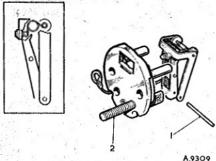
Fitting the rocker assembly to the pedestal. (Inset) the correct position of the centre toggle spring
